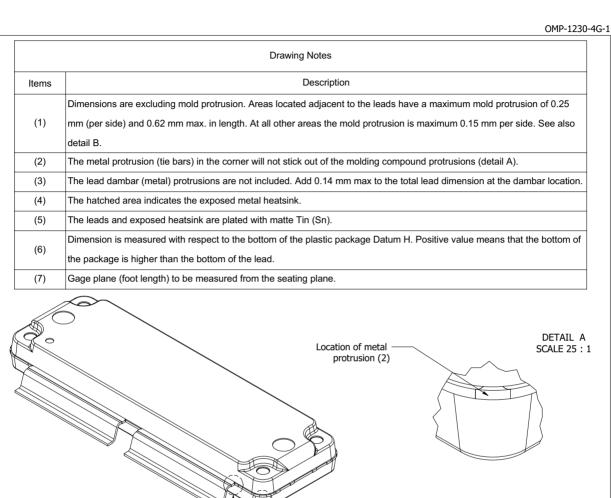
Package outline OMP-1230-4G-1 (sheet 1 of 2)
